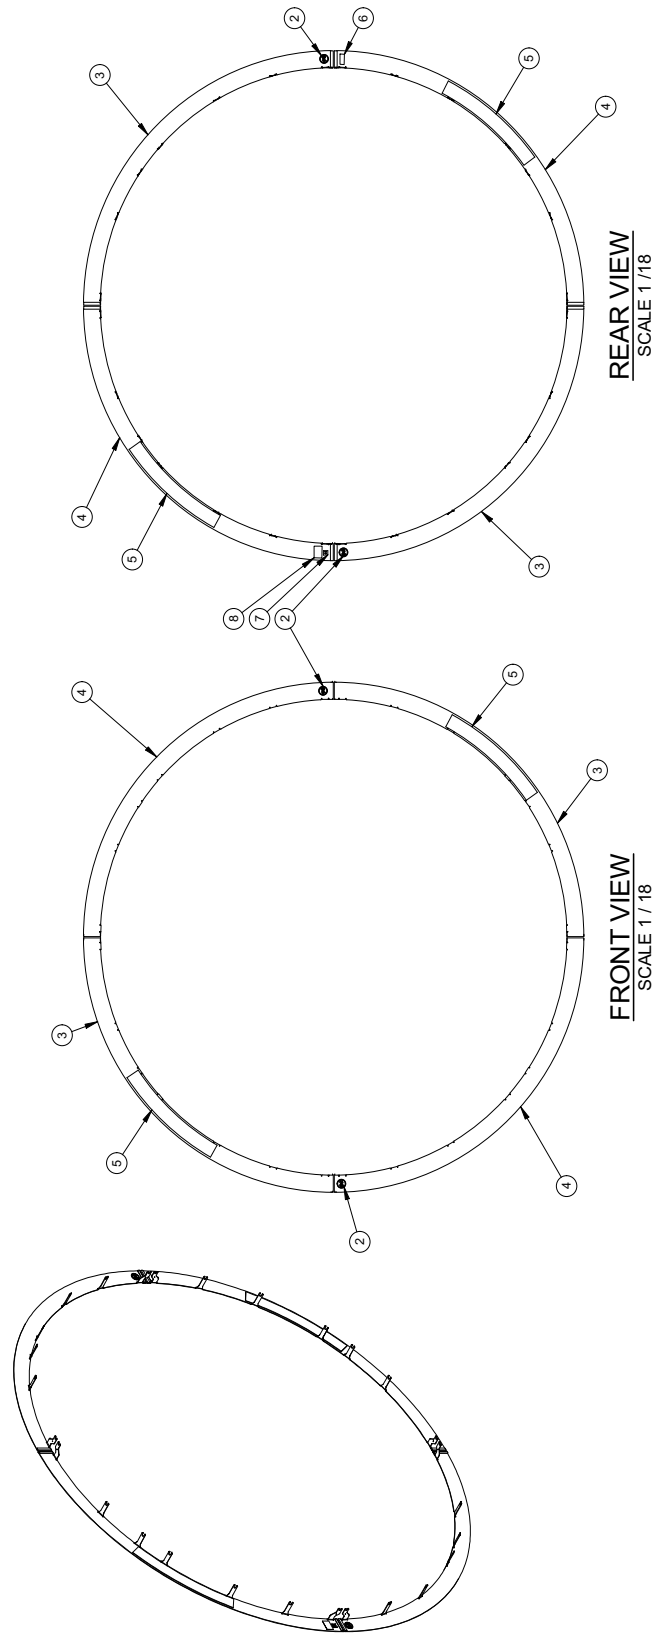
BCF-56 DEFENDER™ GUARD KIT ASSEMBLY (P/N 97221)
